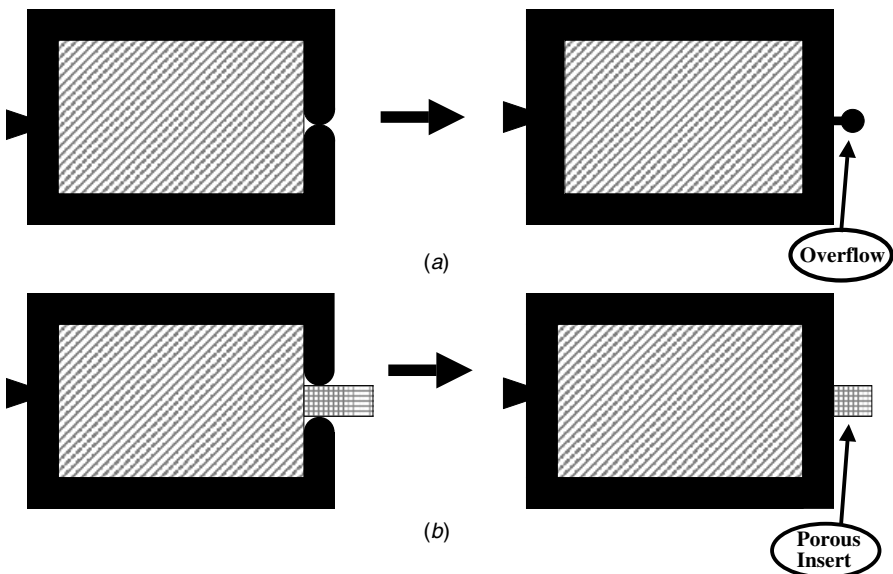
Weld line solutions: (a) overflow design; (b) porous insert design.
